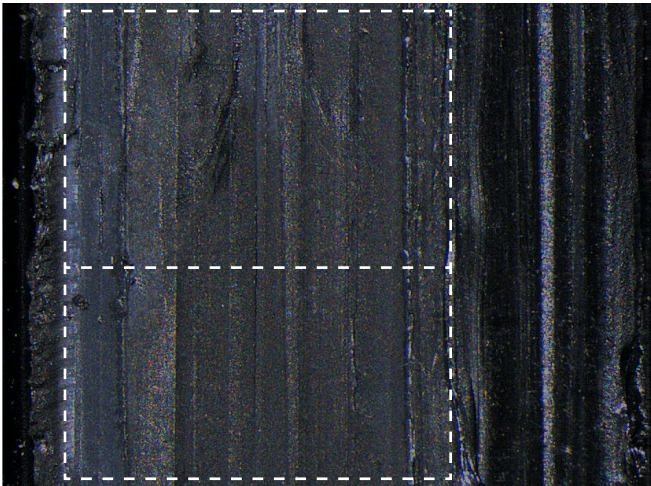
Brittle fracture zone on the EF fitting side of the weld at 6.4x magnification.
